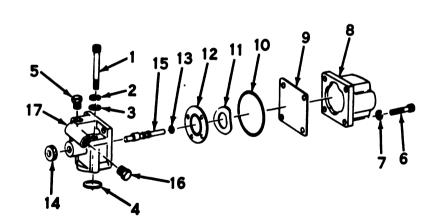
Fuel shut down valve, removal, disassembly, reassembly, and installation (sheet 1 of 2).
